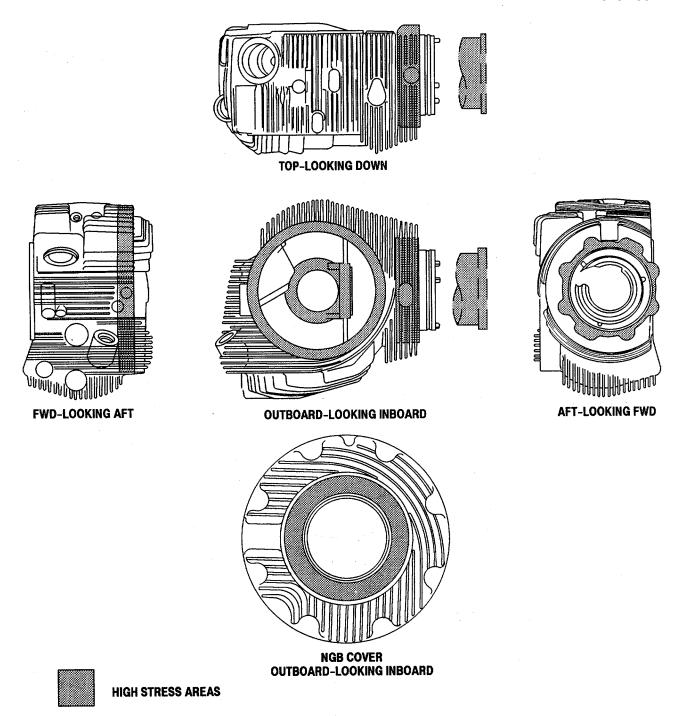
Engine Nose Gearbox Housing and Cover High Stress Areas
